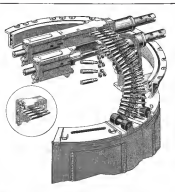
Ammunition feed to two guns of four-gun turret is illustrated by cutaway sketch.
